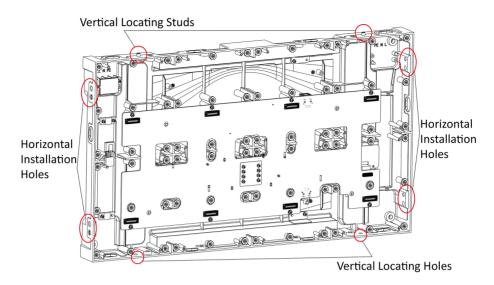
Locating Studs, Locating Holes and Installation Holes
